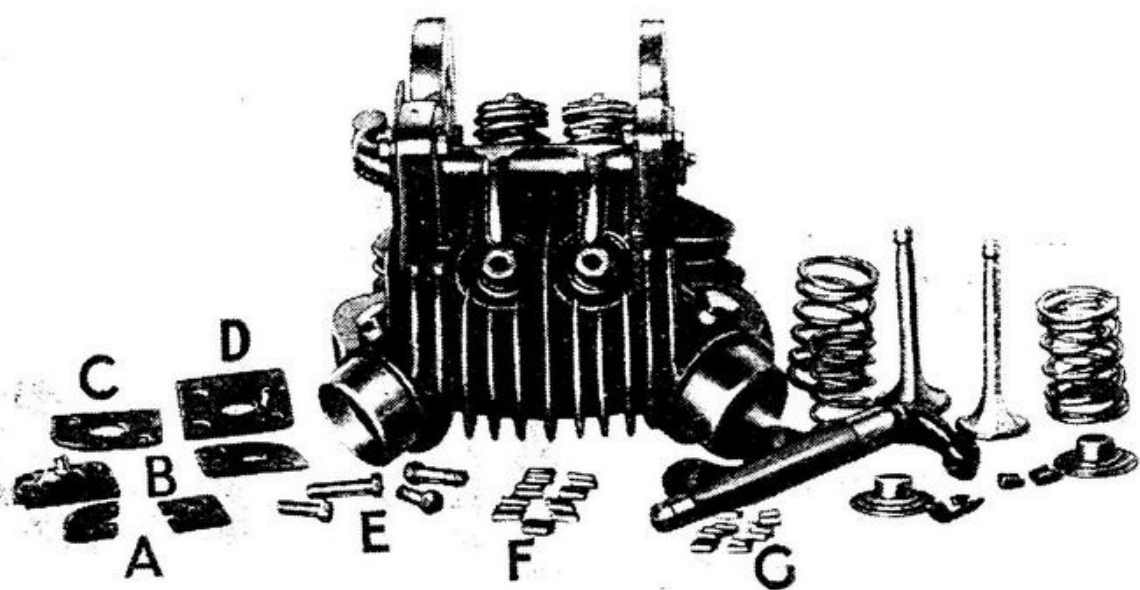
THE 500 c.c. CYLINDER HEAD AND ROCKERS.
